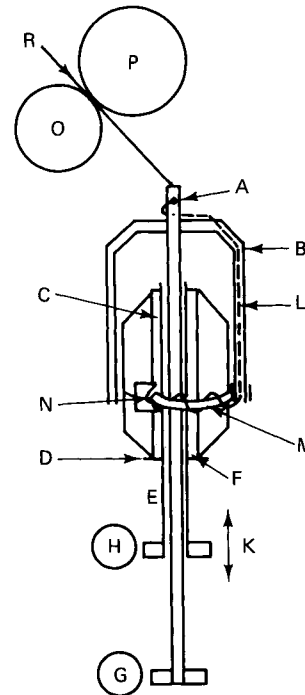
Bobbin lead delivery (side elevation). A, hollow spindle top; B, hollow flyer leg; C, bobbin; D, bobbin plate; E, bobbin tube; F, bobbin driving peg; G, constant speed spindle drive; H, variable speed bobbin drive; K, lifter traverse motion; L, slubbing inside flyer leg; M, presser arm; N, presser paddle; O, drafting zone bottom front roller; P, drafting zone top front roller; R, drafted fibres
